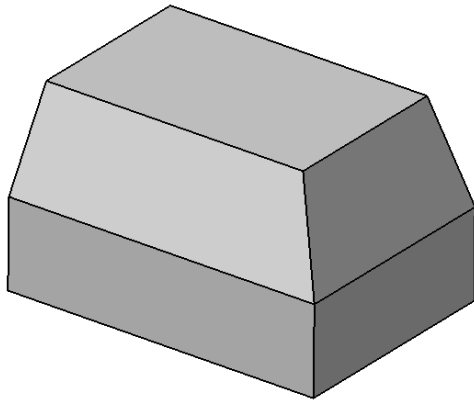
Faces drafted with the Parting = Neutral check box selected
